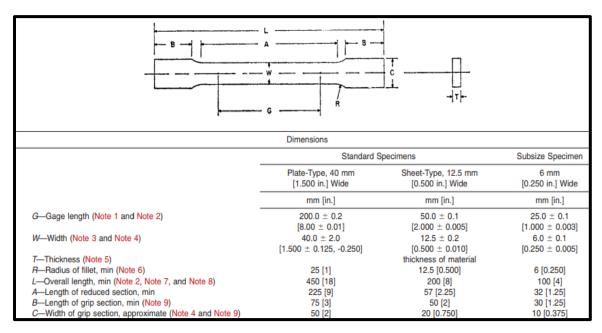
Dimension of specimen for tensile test refer ASTM E8.
